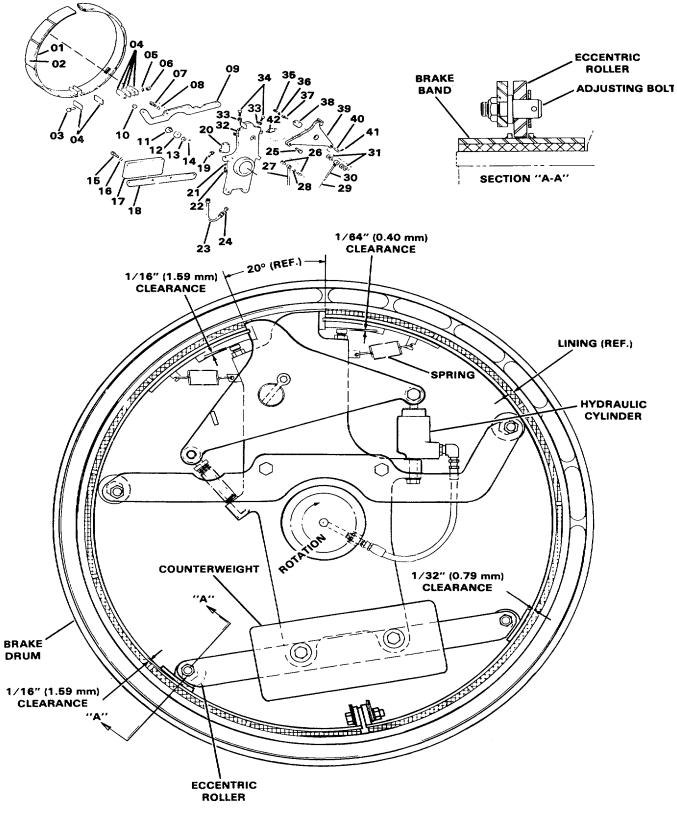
F-1. Front and Rear Drum Clutch (910J357-6) 7F-2
